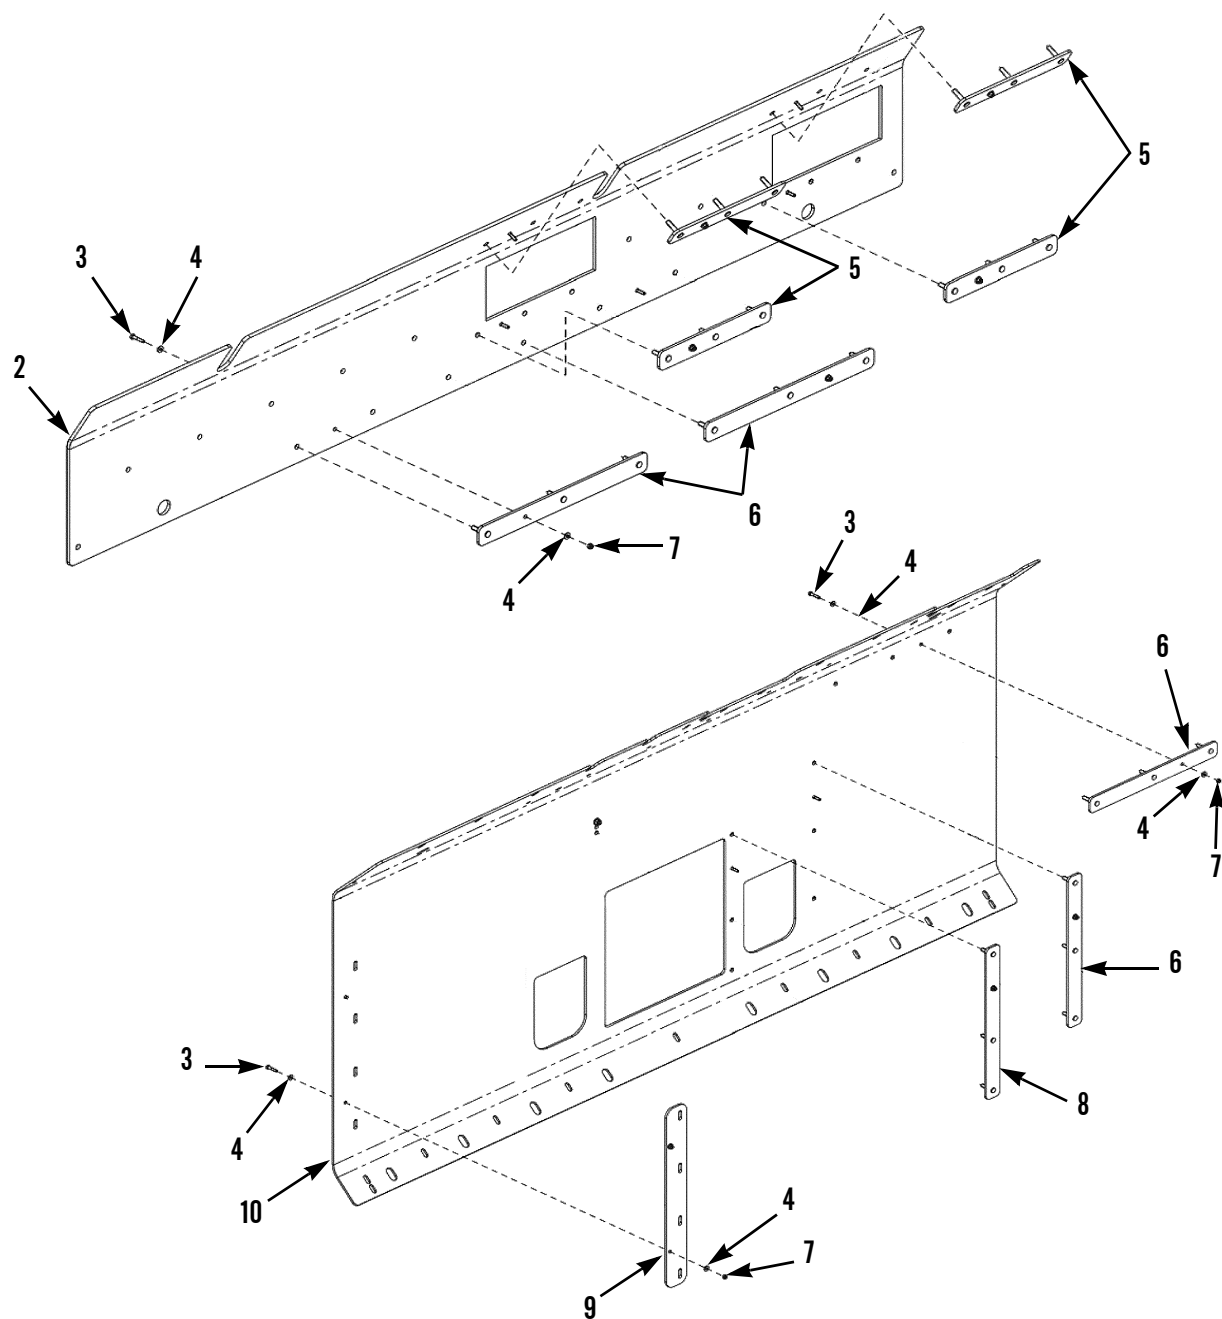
Front Armor Kit and Mounting Hardware (Sheet 1 of 4)
